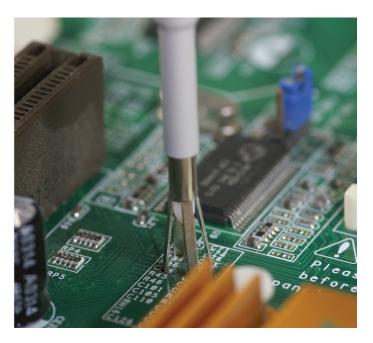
The Keysight N2885A PCB adapter sockets are designed to solder into a printed circuit board (PCB) as test points to minimize ground inductance and maximize signal fidelity. This package contains 25 sockets.
